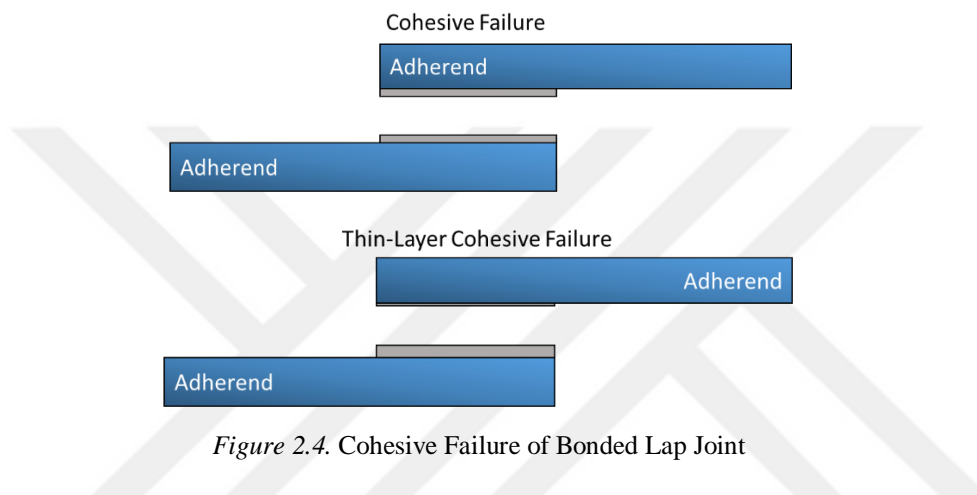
Cohesive Failure of Bonded Lap Joint
